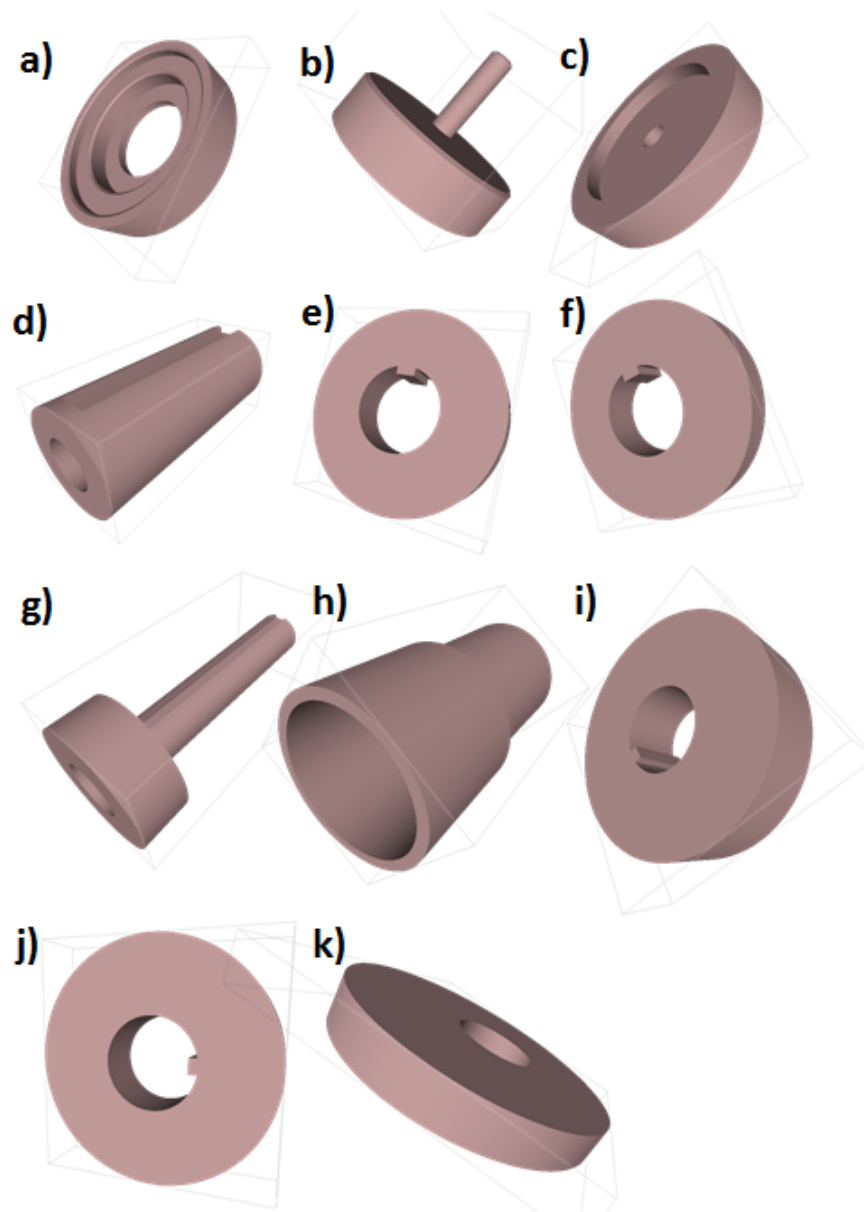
Simplified 3D printed jet engine replica: (a) Front Shroud Safety (b) Main Fan (c) Shroud (d) Front Shaft (e) First Compressor (f) Second Compressor (g) Rear Shaft (h) Shell (i) Rear Bearing (j) Exhaust Turbine (k) Cover.
